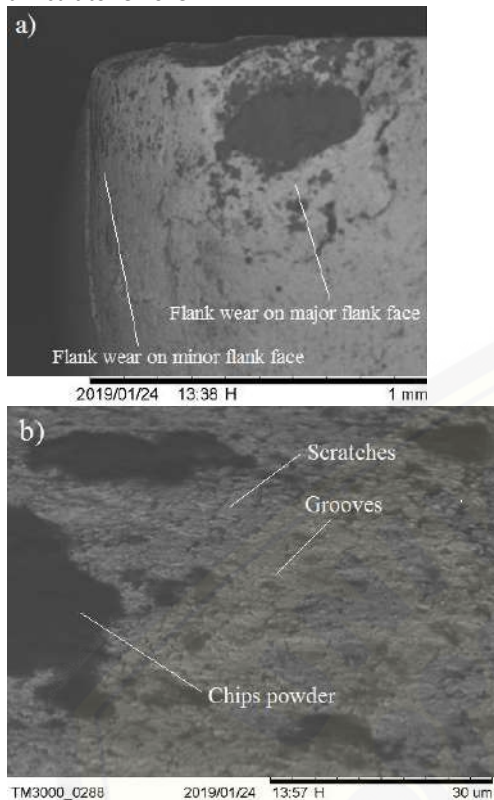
SEM image tool wear on rake angle 0° after marble rock machining a) Magnification 100x, b) Magnification 2500x
